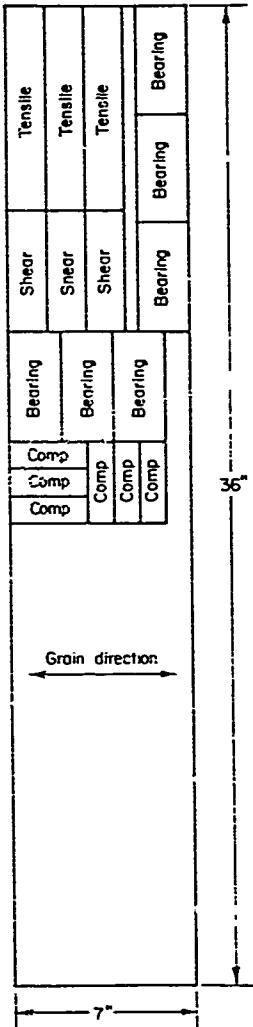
Location of Test Specimens, 0.090-inch Thick Sheet
